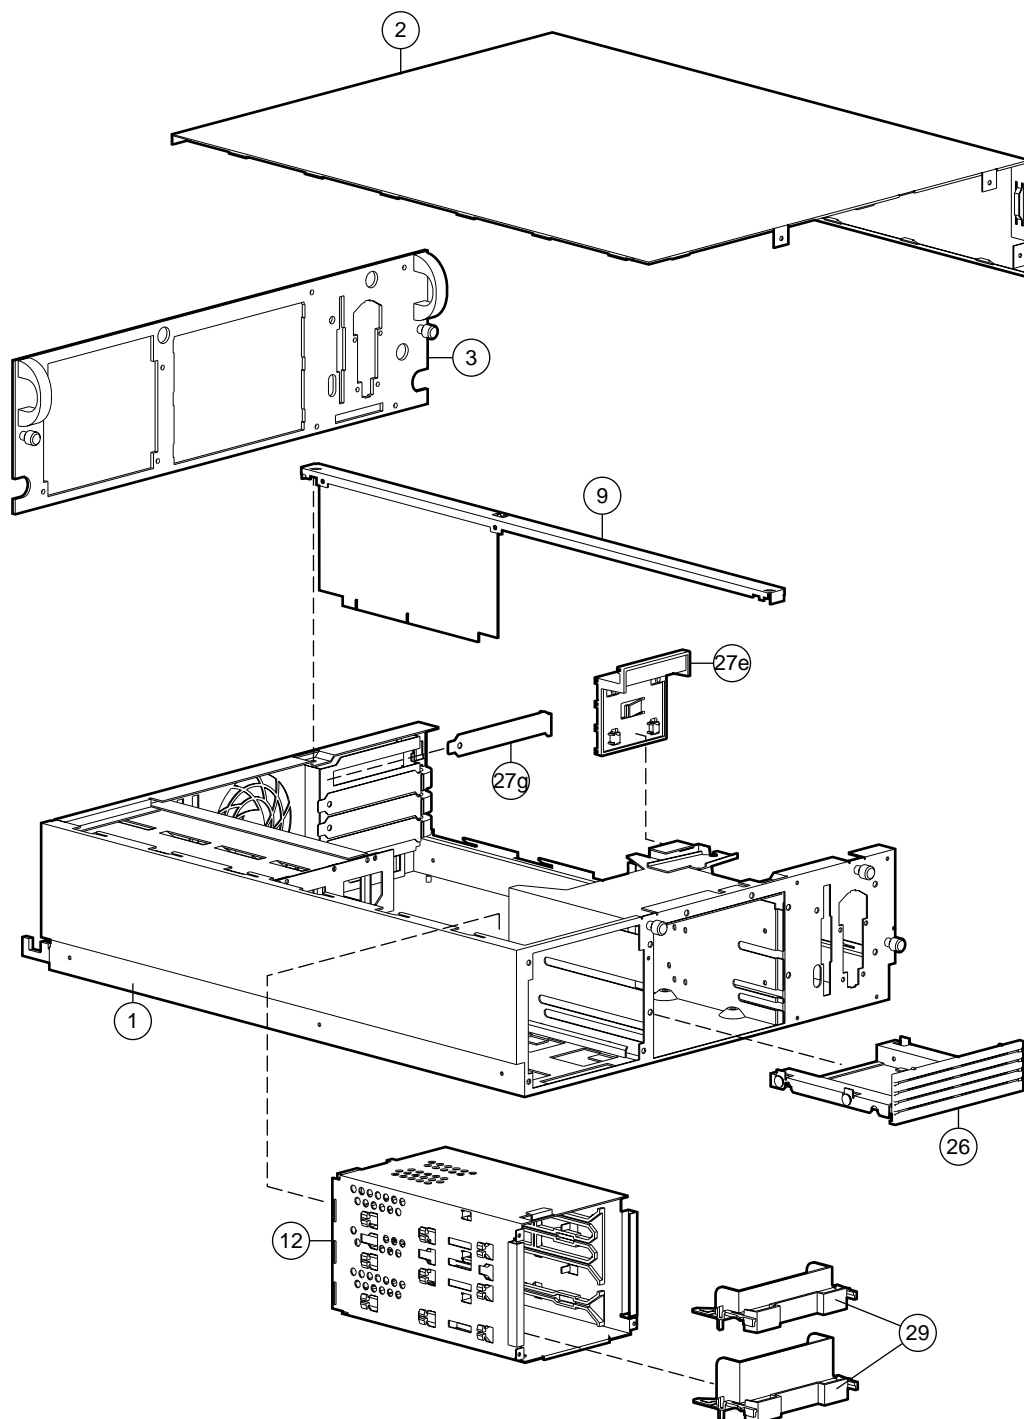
Mechanical parts exploded view of the ProLiant 1850R server
